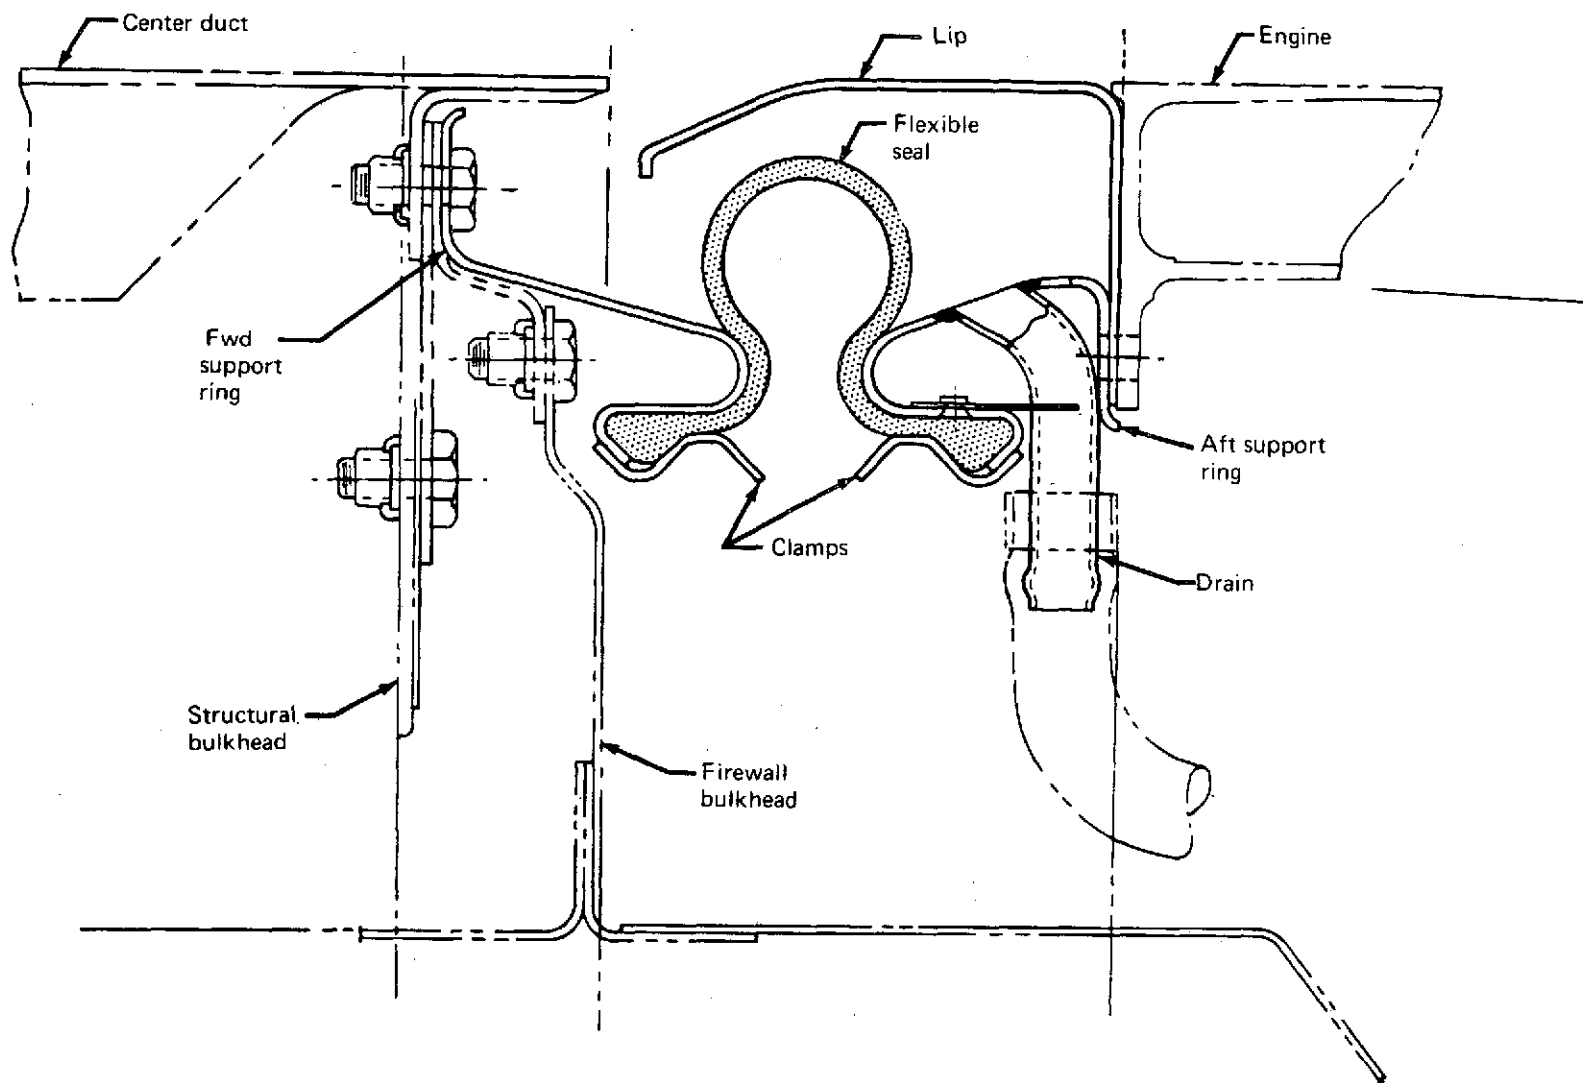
727/JT8D CENTER DUCT TO ENGINE FLEXIBLE SEAL ASSEMBLY
